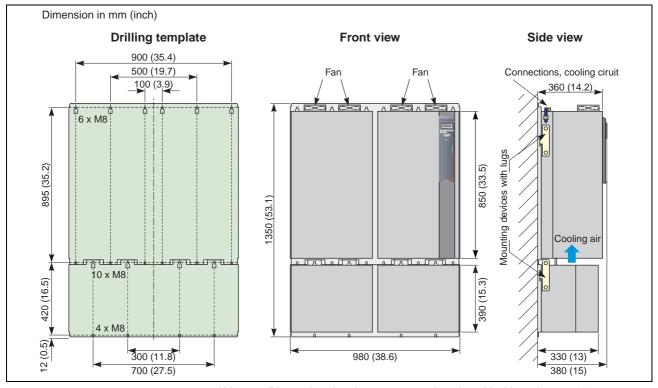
Dimension drawing converter size class H without heat exchanger
